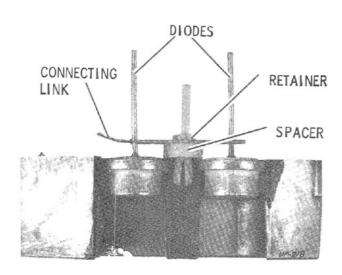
INSTALLATION DETAILS OF RECTIFIER DIODE ASSEMBLY
